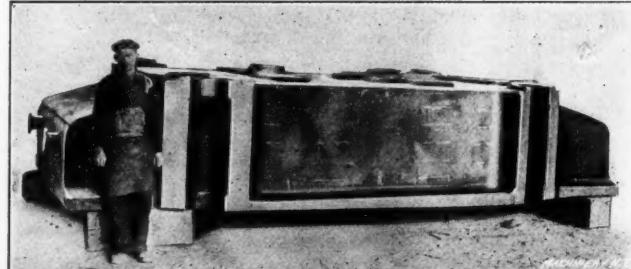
Another View of the Steel Casting shown in Fig. 10. This is One of the Largest Steel Castings made
